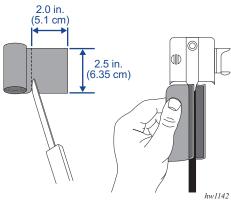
Cutting and Stripping the LDF4 Cable Jacket
